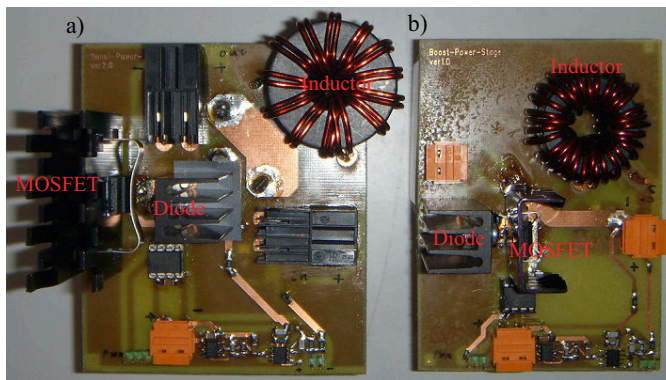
The prototypes of a) conventional and b) modified designs.
